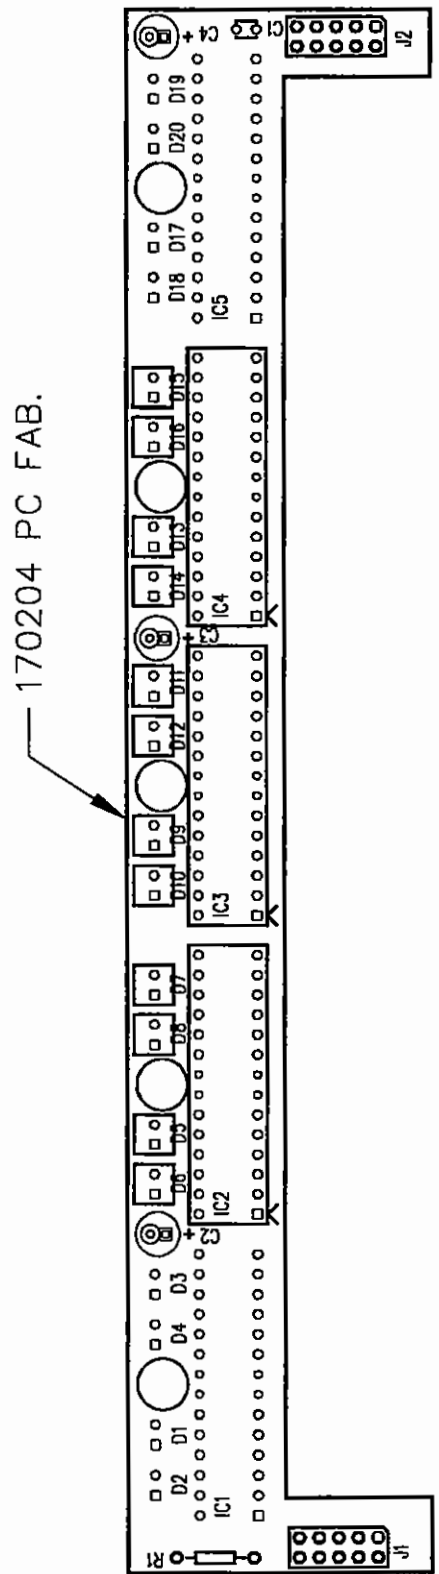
Assembly Drawing - ICS-52 Selector Switch LED PCB Rev. A
